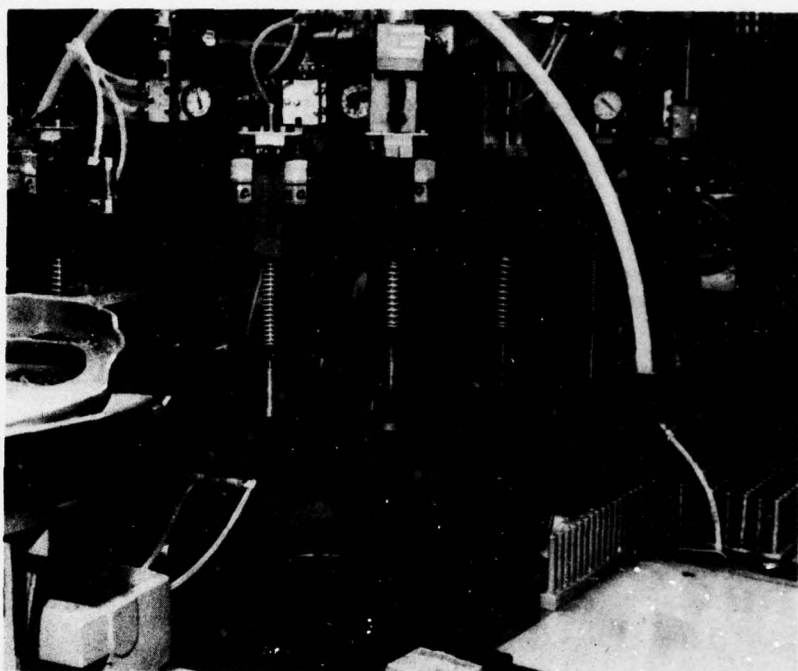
ADAM Sensor Case and Bobbin Assembly Machine
